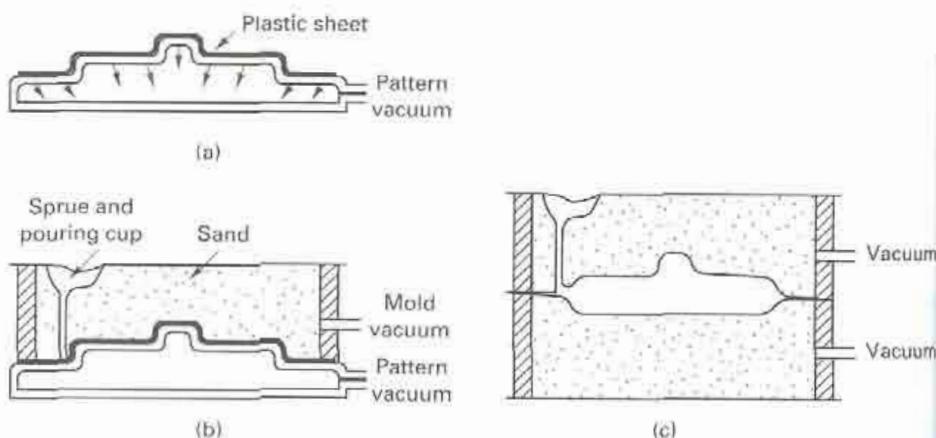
Schematic of the V-process or vacuum molding. (a) A vacuum is pulled on a pattern, drawing a heated shrink-wrap plastic sheet tightly against it. (b) A vacuum flask is placed over the pattern and filled with dry unbonded sand, a pouring basin and sprue are formed; the remaining sand is leveled; a second heated plastic sheet is placed on top; and a mold vacuum is drawn to compact the sand and hold the shape. (c) With the mold vacuum being maintained, the pattern vacuum is then broken and the pattern is withdrawn. The cope and drag segments are assembled, and the molten metal is poured.
